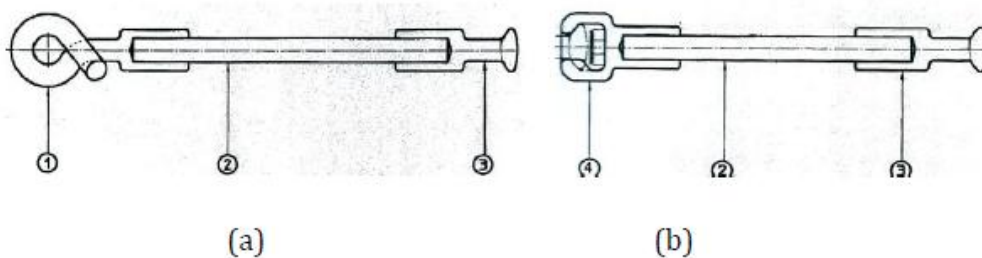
End fittings designs: pig and pin design (a) and socket and pin design (b). Pigtail (1), core (2), pin (3) and socket (4).
